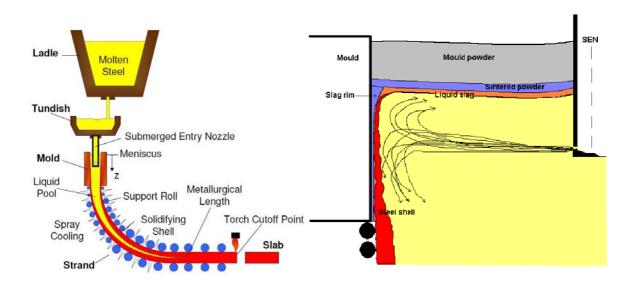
Schematic diagrams of Continuous Casting Process and Mold in the steelmaking process
